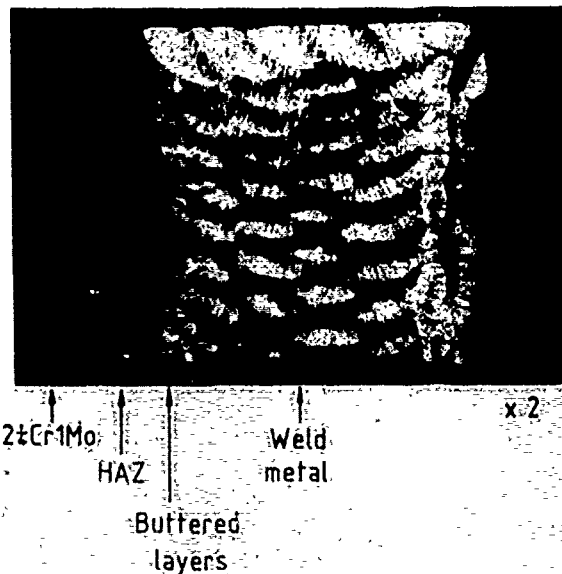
Section through a multipass weld showing weld metal and HAZ regions of 2½Cr1Mo parent steel plate.
